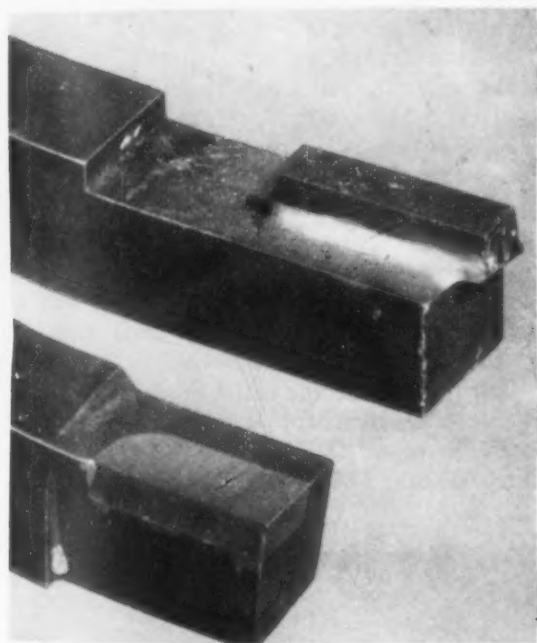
High speed steel or tungsten carbide tips, formed from scrapped tools, can be welded onto carbon steel shanks to make new tools. Though shank at top was not formed to accommodate the tip, as shank at bottom was, the tool is strong enough for even heavy-duty work.
